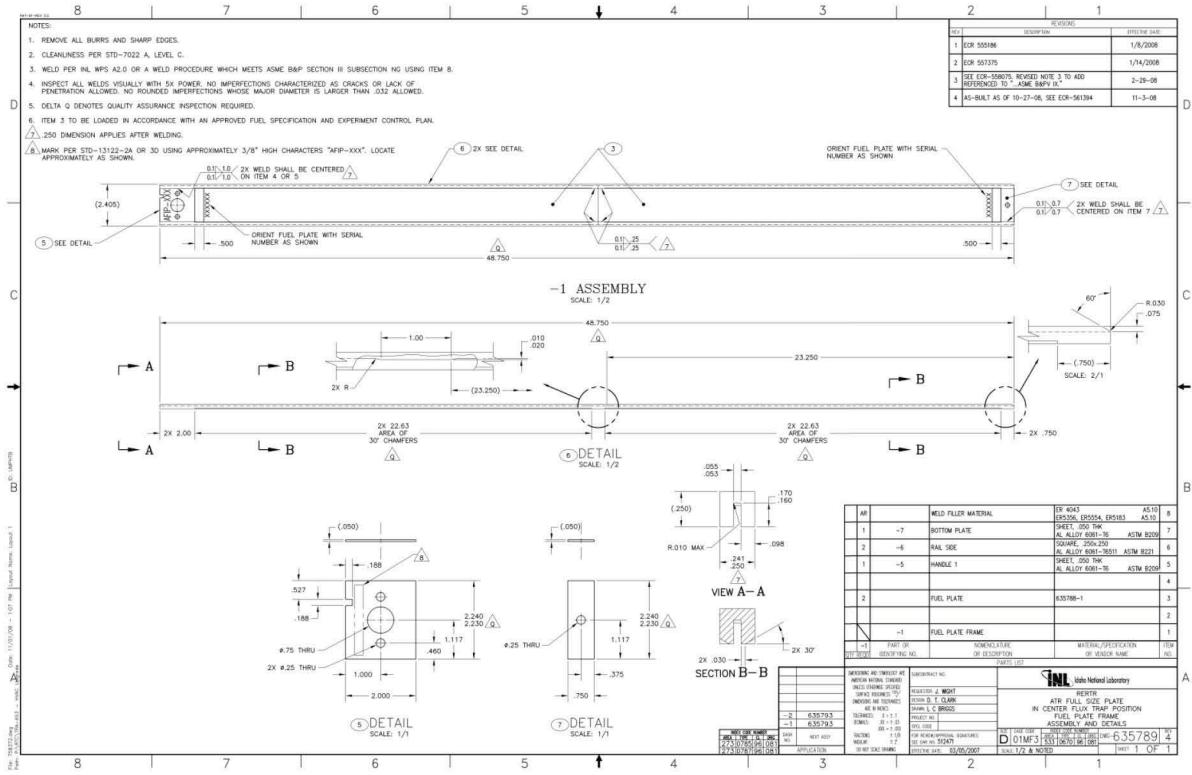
DWG-635789 REV 4 AFIP-2 Frame Assembly
